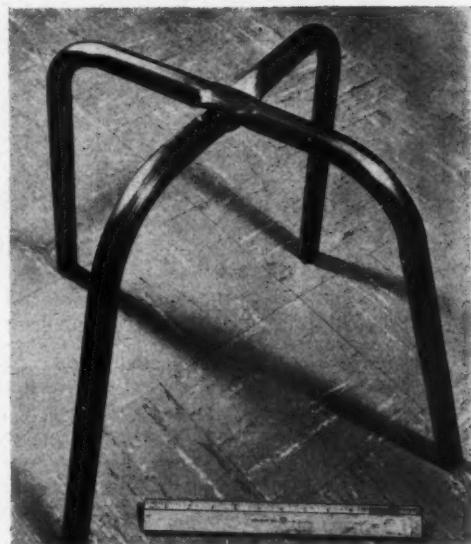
Shaped by multiple press bending, these coined U-frames are crossed in the manner illustrated and welded to form legs for a school chair
